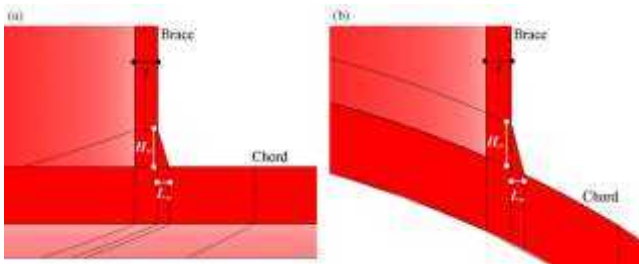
Weld dimensions: (a) Crown position, (b) Saddle position
